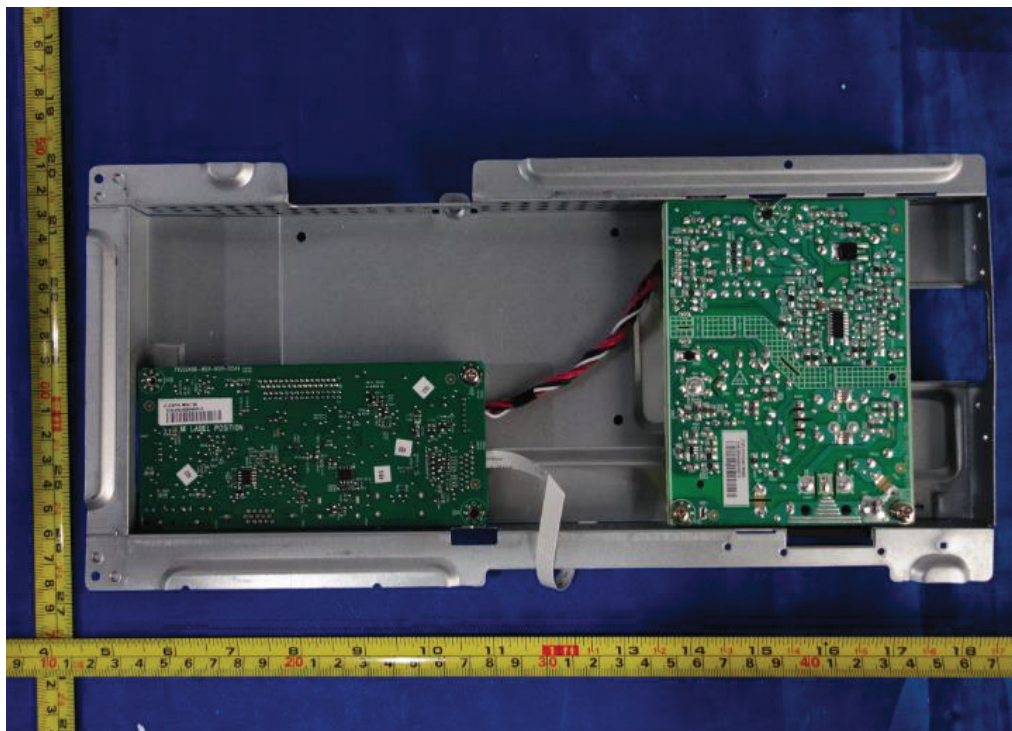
Metal enclosure type C with power board 715G7300 and main board 715G9496
